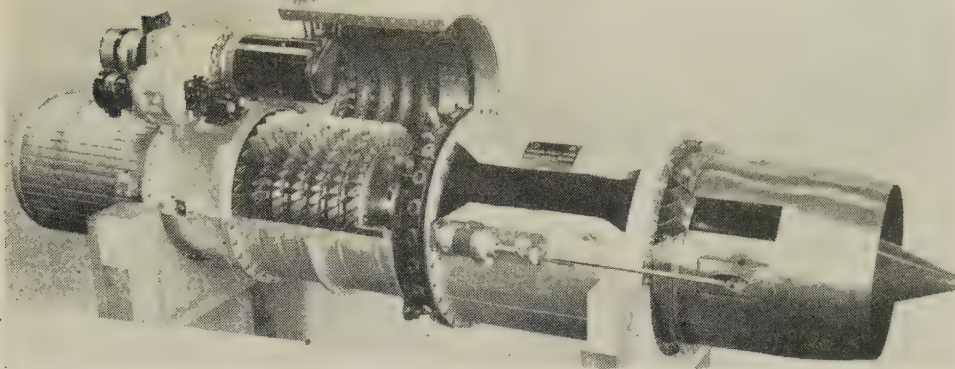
A 19-IN. TURBOJET UNIT WITH COMPRESSOR COVER REMOVED TO SHOW DETAILS OF SYMMETRIC-TYPE COMPRESSOR
